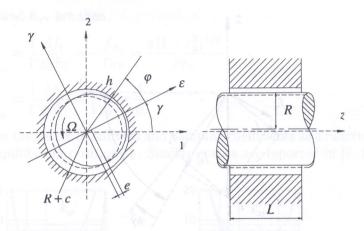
Clearance geometry of fluid-film cylindrical bearing
